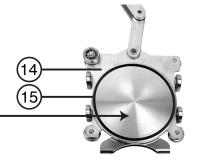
Carriage and Gate (ball groove mechanism type shown)
